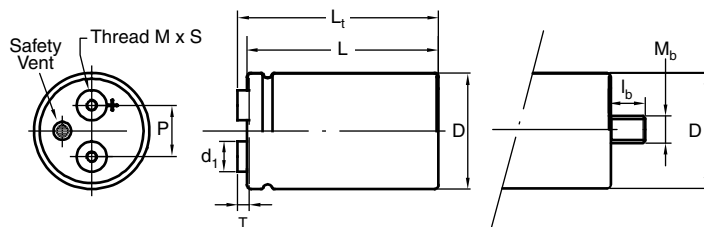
B: High current M6-18 mm disc and 1/4-28 UNF disc: Screw Terminal (ST) and Screw Terminal Bolt nut (STB)
